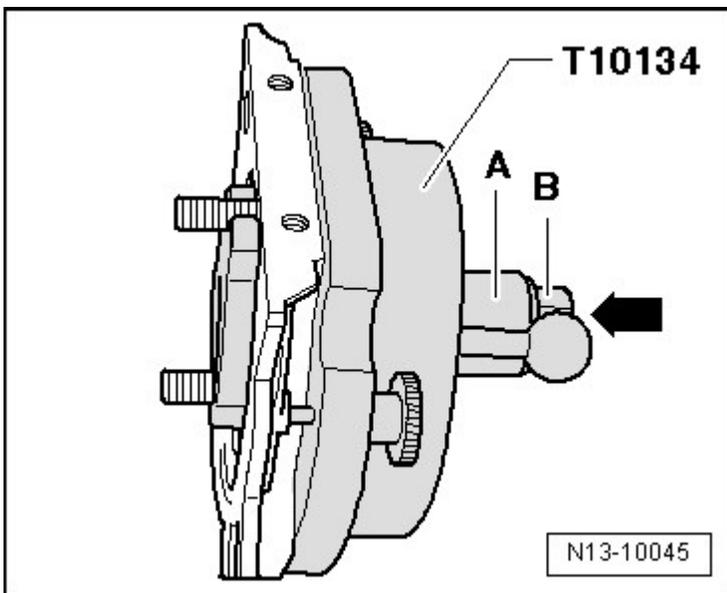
Identifying Threaded Spindle Pressed Of Assembly Tool T10134 Until Nut Rests On Assembly Bell
